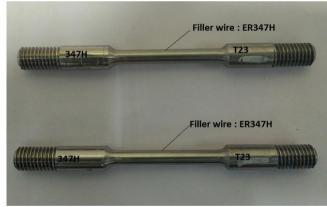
Specimen pieces prepared for hot tensile test (SS347H+T23 welded with Filler wire ER347H).
